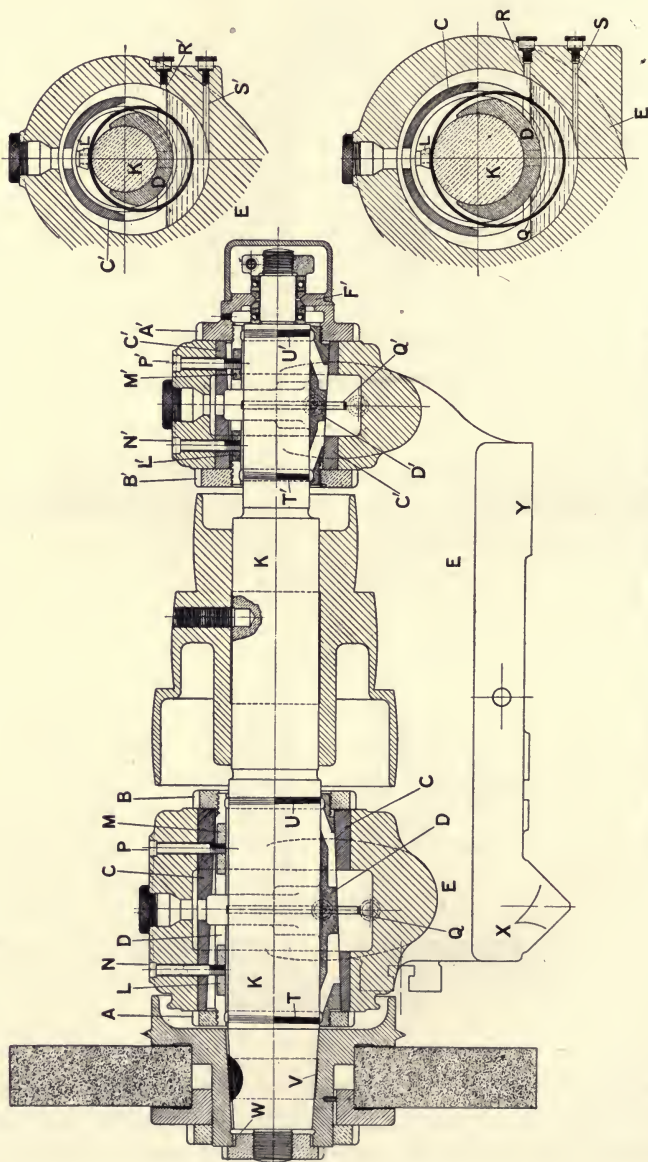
CHURCHILL WHEEL SPINDLE (PLAIN GRINDER)
